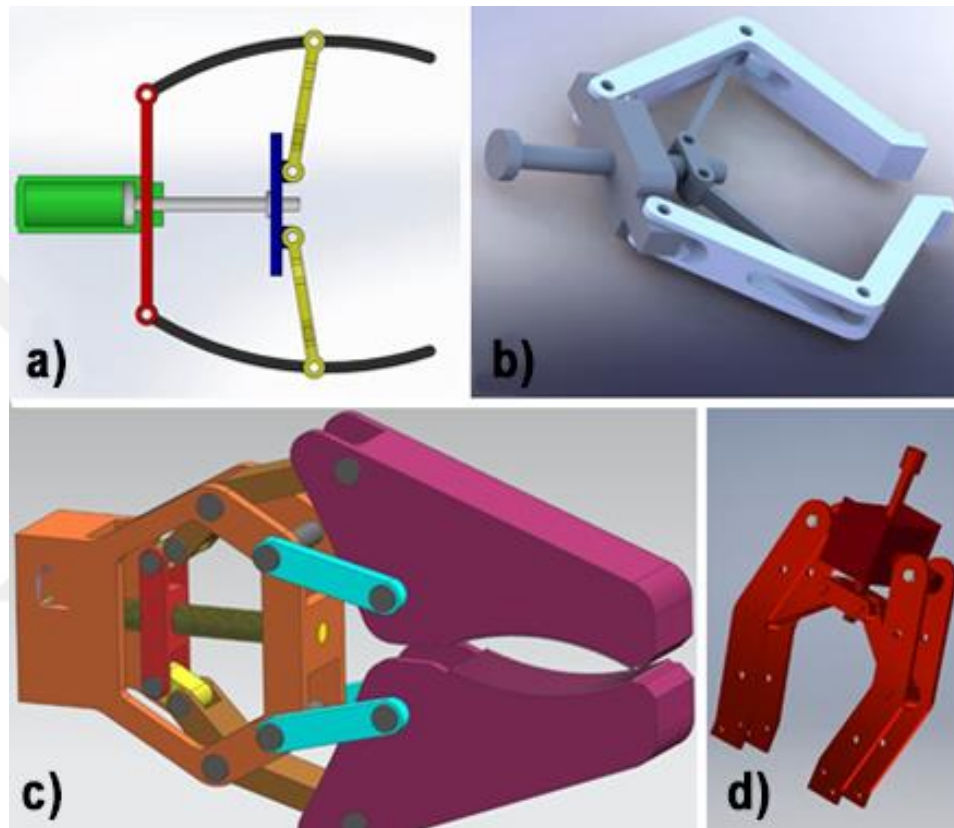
Mechanisms driven by force transfer rod on middle to drive gripper arms (a is pneumatic-hydraulic gripper [12], b is a rod driven robotic arm gripper [13], c is screw driven robot gripper [14], d is motorized rod driven gripper model [15])
